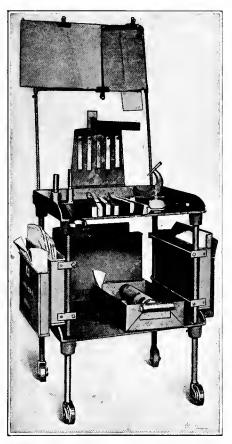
Shop Tool Stand for Holding Tool List, Instruction Card, Blueprints, and Sets of Tools
